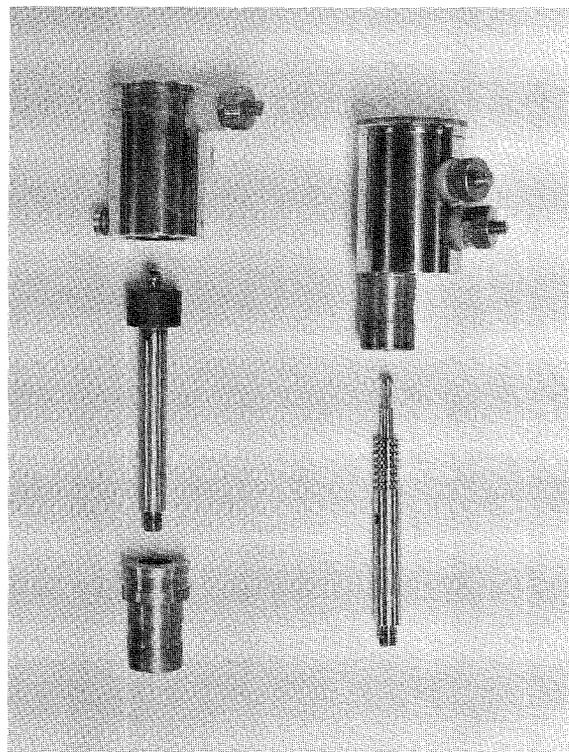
Magnetic switch contact chamber, shaft, and adapter bushing, left; and cat's whisker contact chamber and shaft, right.
